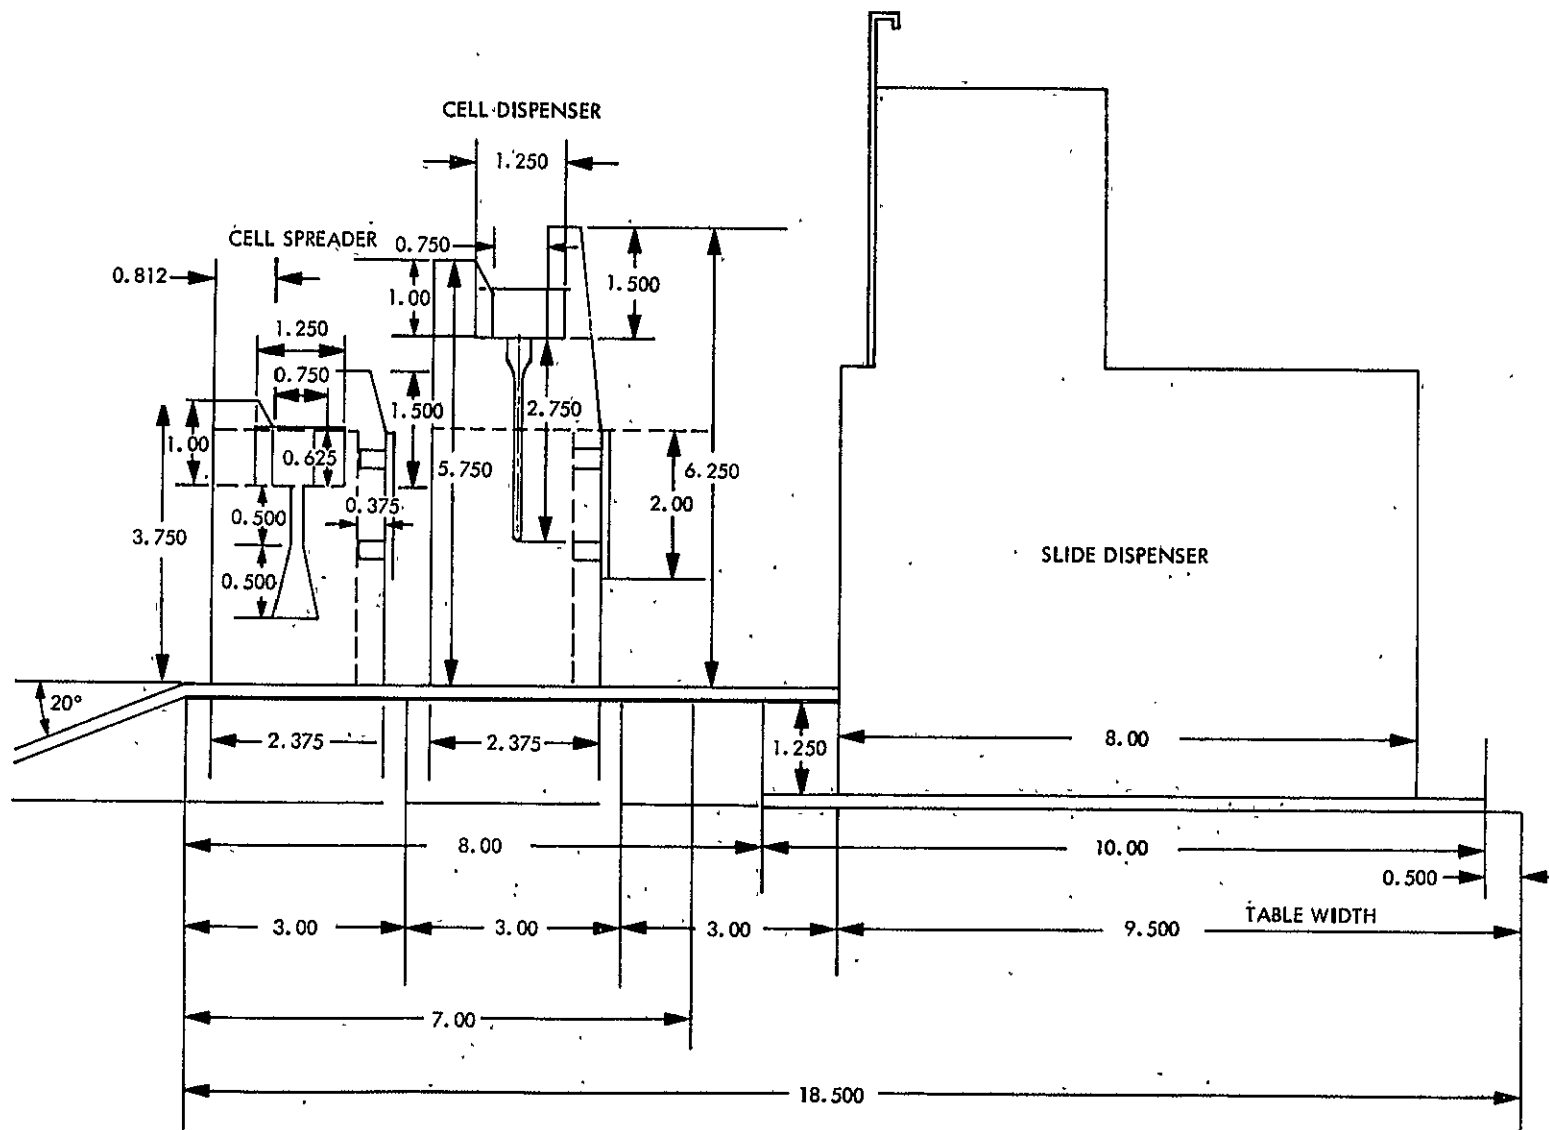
Slide Dispenser, Cell Dispenser and Cell Spreader. Side View
